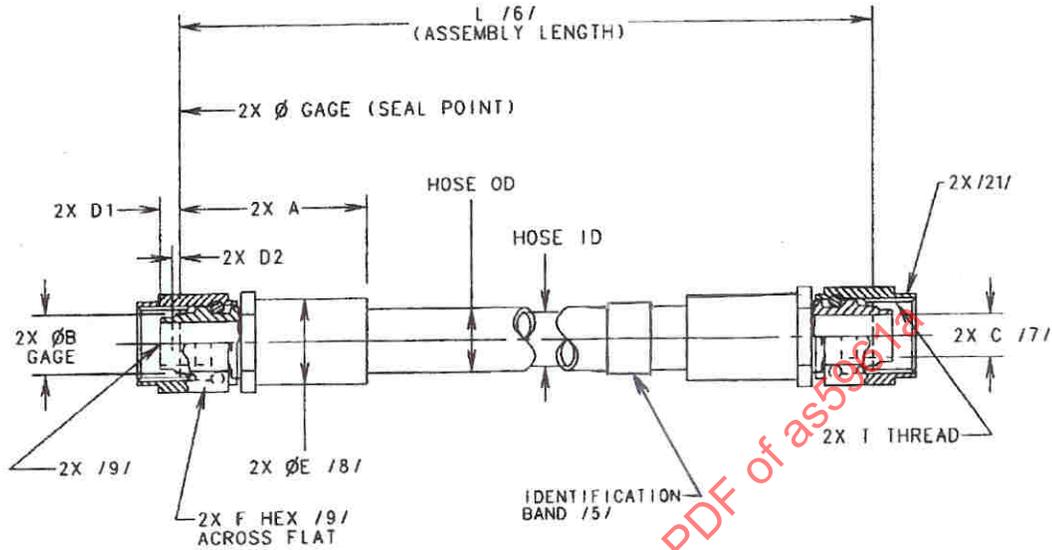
HOSE ASSEMBLY DIMENSIONS
